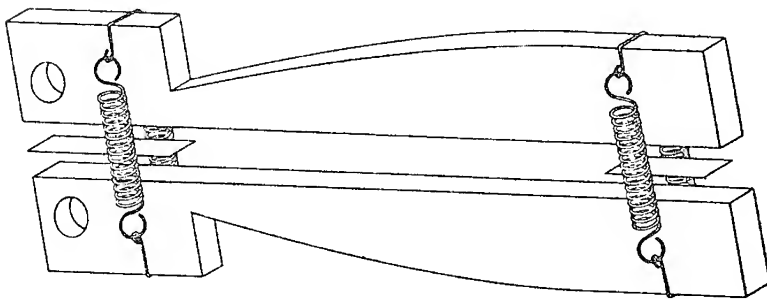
Schematic of tapered double-cantilever beam adhesive fracture test specimen.<sup>16</sup>
